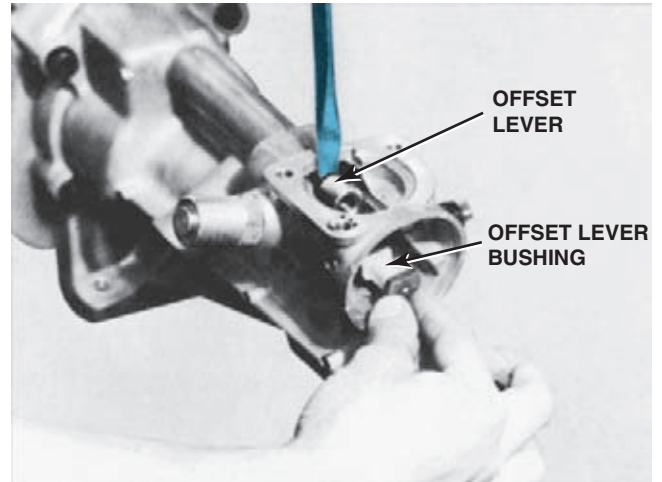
On this transmission, it is necessary to disconnect a part of the shift linkage before removing the extension housing. (Courtesy of Ford Motor Company)
